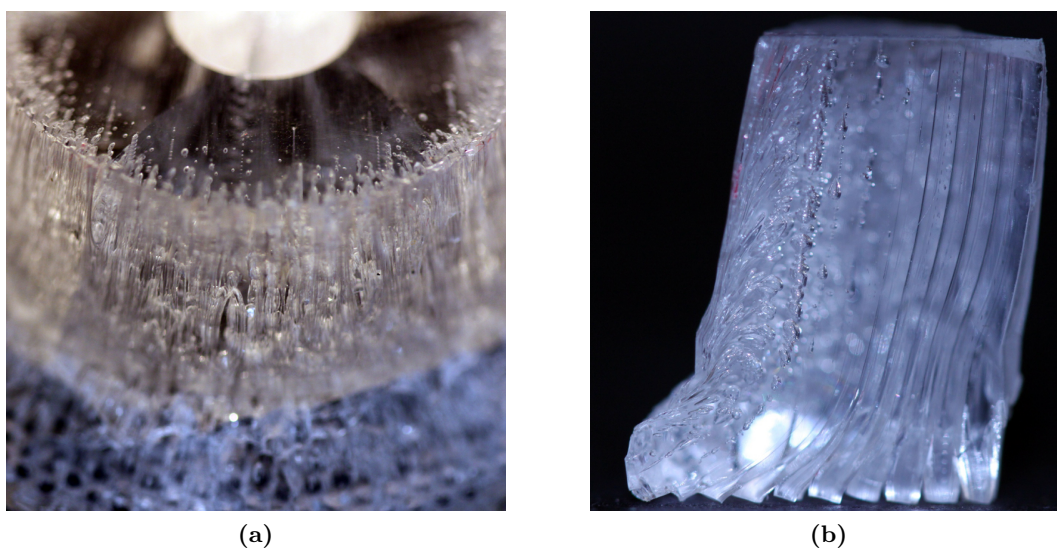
Thick wall extruded material close to die exit (a) cross section and (b) longitudinal section.
